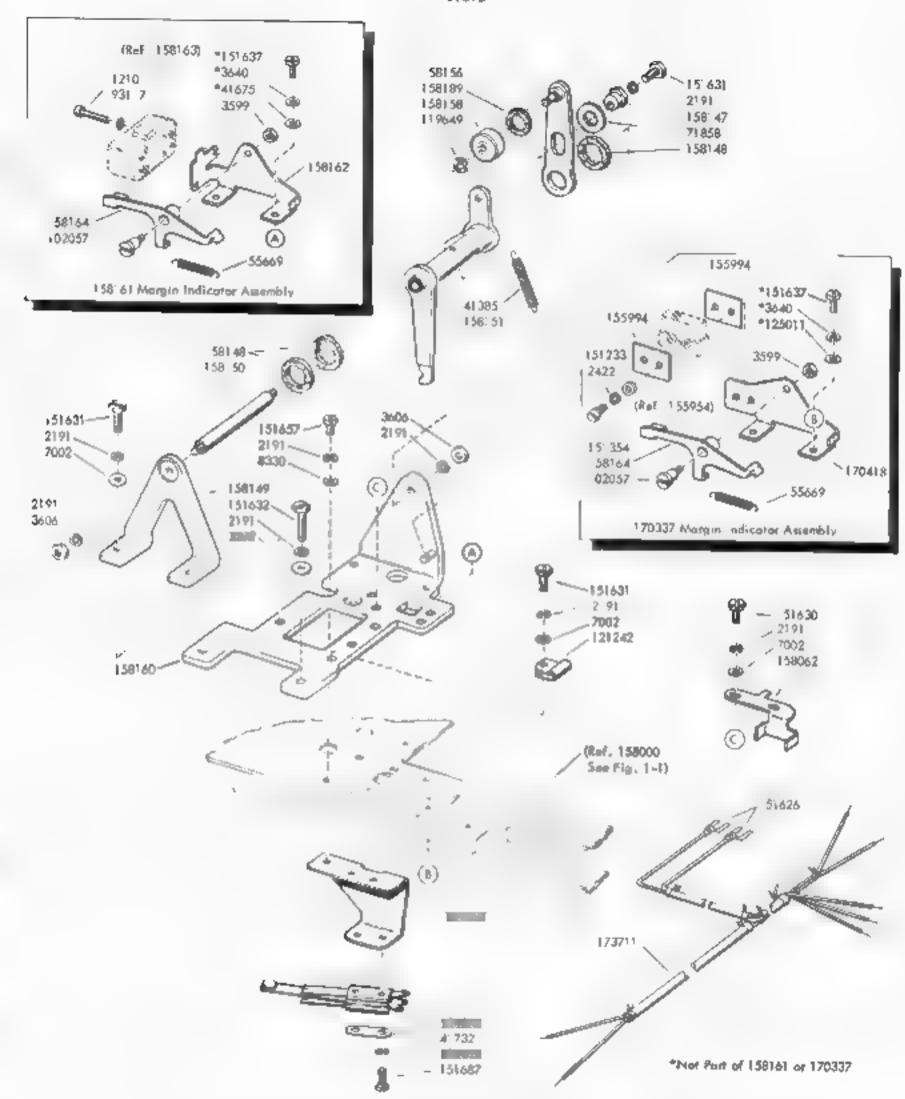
CAM FOLLOWER MECHANISM AND MARGIN INDICATOR ASSEMBLIES
